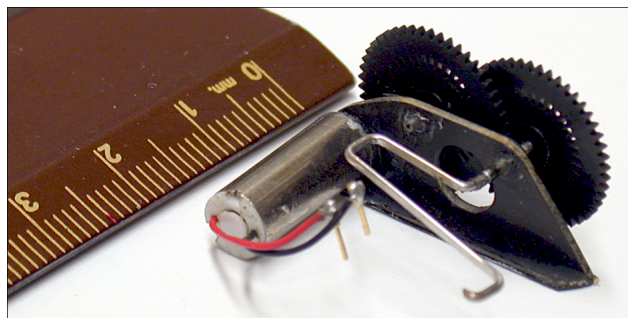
2.7-gram pager-motor/gearbox/crankshaft assembly.
